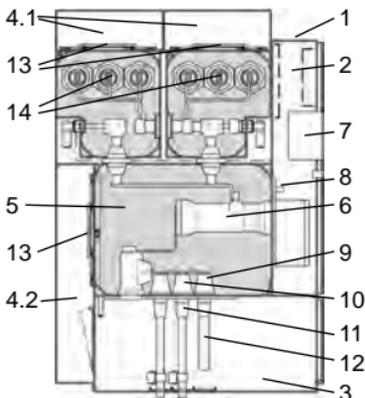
Metal-clad gas-insulated switchgear with double busbar system type ZX2
